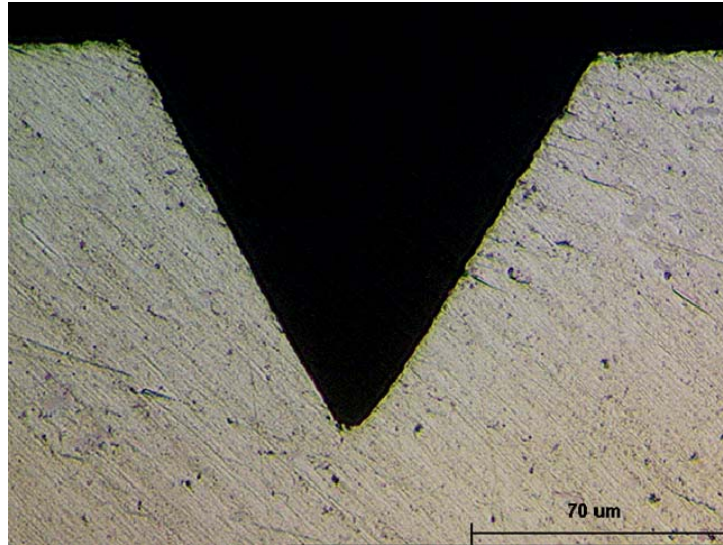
Artificial scribe machined by diamond tipped scribing tool
